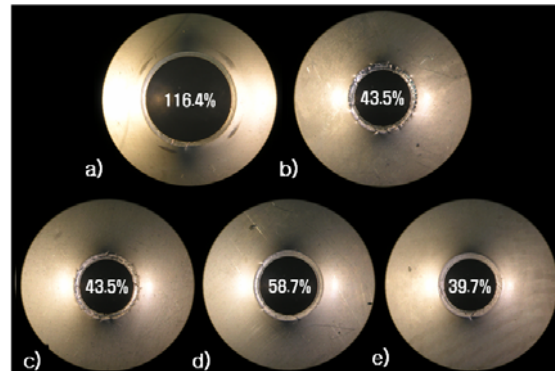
Typical fractures of DP590 2.3mm materials observed in hole expansion test for various clearances: a) Laser b) 2% c) 9% d) 13.5% e) 22.5%
